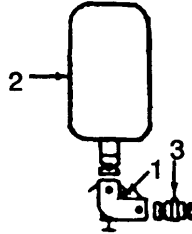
Elbow Coupler Valve, Removal/Installation.
